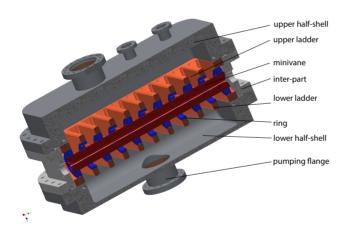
Isometric view of the Ladder-RFO. The cooper carrier-rings (for a better view coloured in blue) guarantee the electrode positioning as well as the RF contact. The ladder structure consists of bulk copper components. Any brazing or welding processes are avoided.
